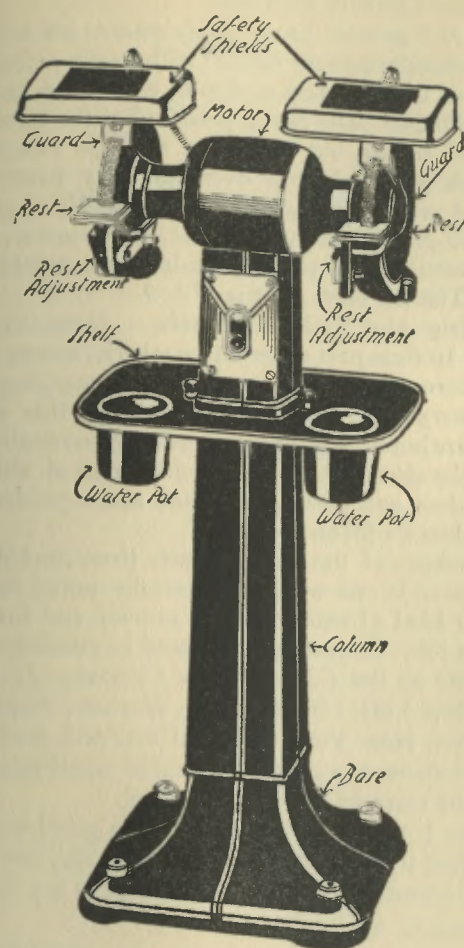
THE DELTA DIRECT DRIVE PEDESTAL GRINDER
